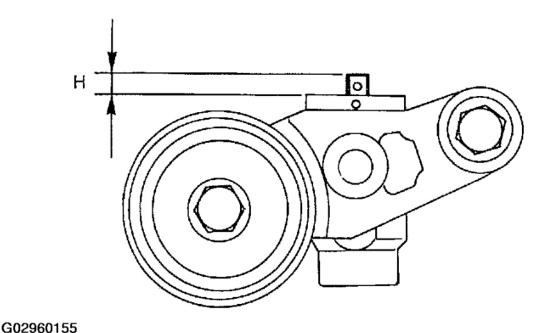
Measuring Extension Of Rod Beyond Body Courtesy of SUBARU OF AMERICA, INC.
